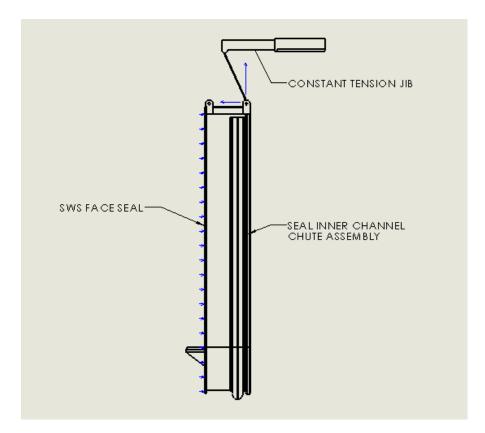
Seal Inner Channel Chute Sealing Force and Secondary Sealing Surface
